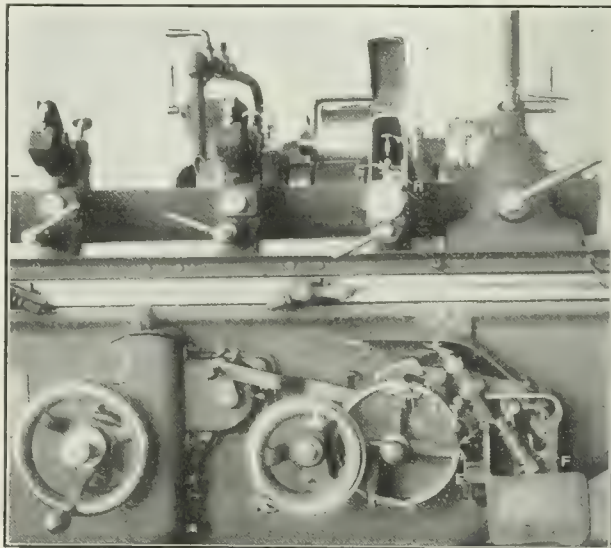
The Wheel Feed and Automatic Sizing Devices.
